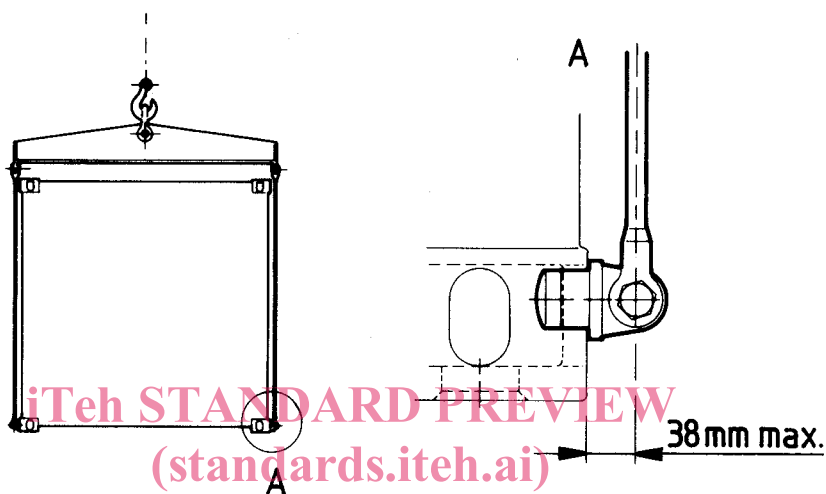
Lifting devices make contact with the bottom corner fittings only
